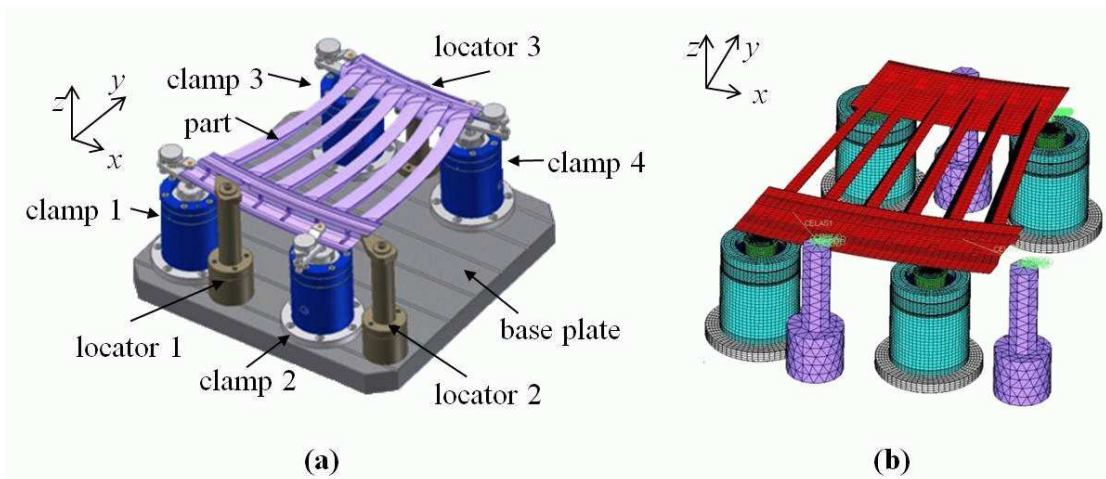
Concept demonstrator of adaptive fixture: (a) 3D solid model, source: [5]; (b) FE model of part-fixture system, source: [5].
